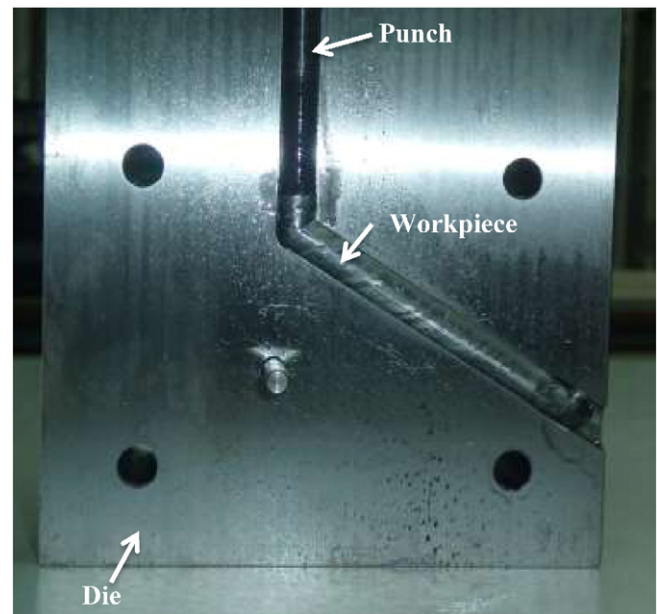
Tube illustration after ECAP and the fabricated tool set, including die and punch.
